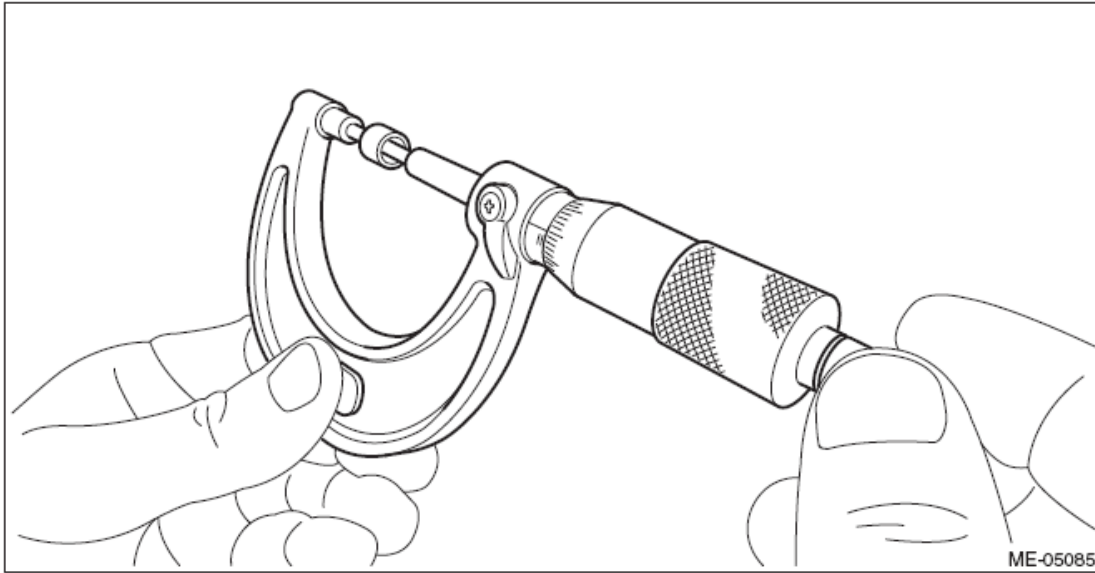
Measuring Thickness Of Valve Shim Using Micrometer
